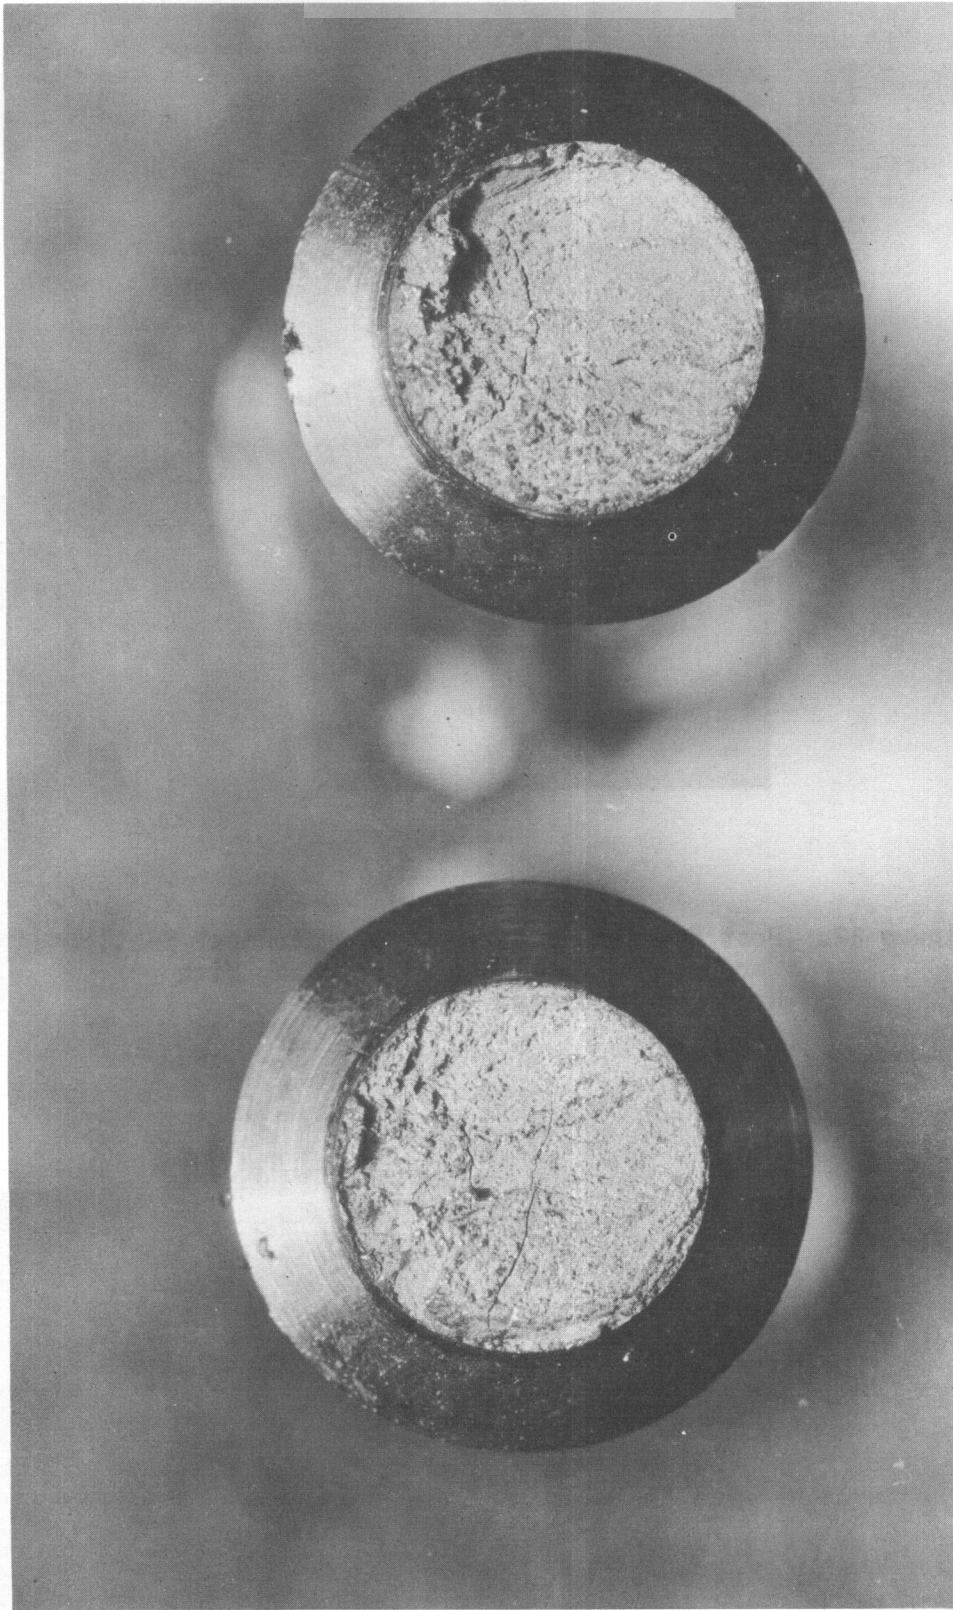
The Appearance of the Fracture Surface for Notched Specimens of High Hydrogen Material. Both Ends of One Specimen. Note the Post Fracture Cracks.
